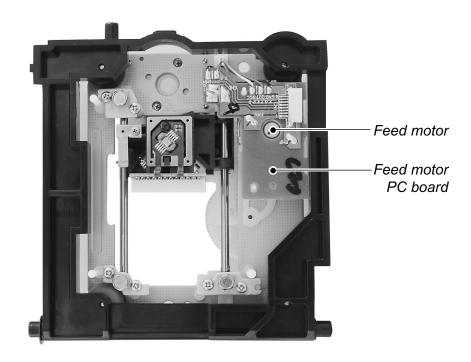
Pickup mechanism chassis assembly (Bottom side)
